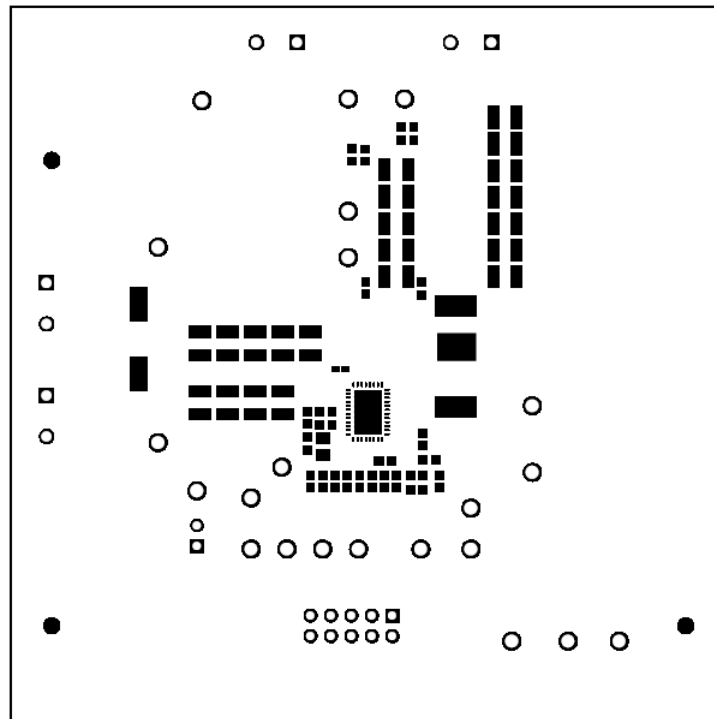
PWR-784EVM Top Solder Mask (Top View)
